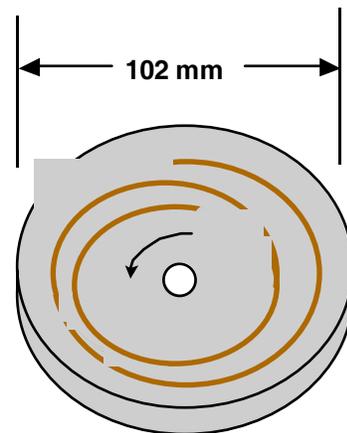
Drawing of 304 SS plate showing pattern of laser weld employed to facilitate the high travel speeds sought in the experiment.
